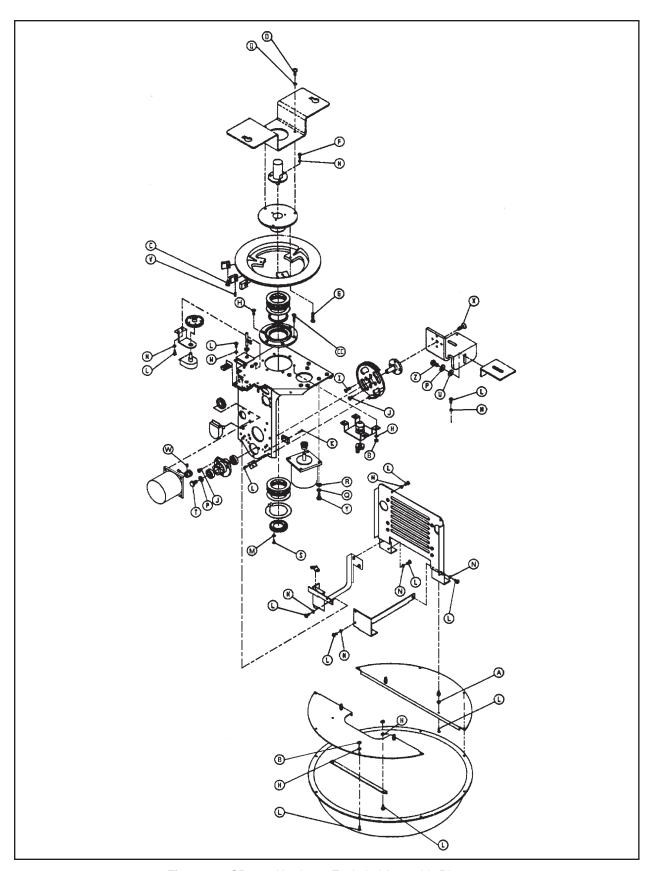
SB2600 Hardware Exploded Assembly Diagram
